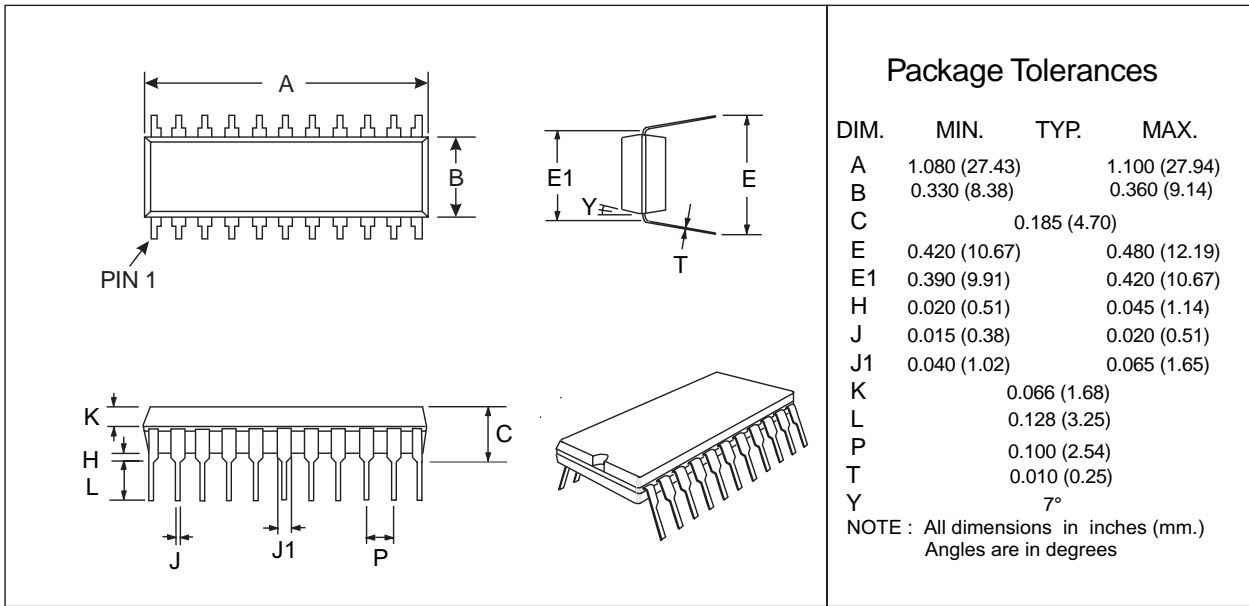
22-pin PDIP (P) Mechanical Outline: *Order as part no. MX629P
